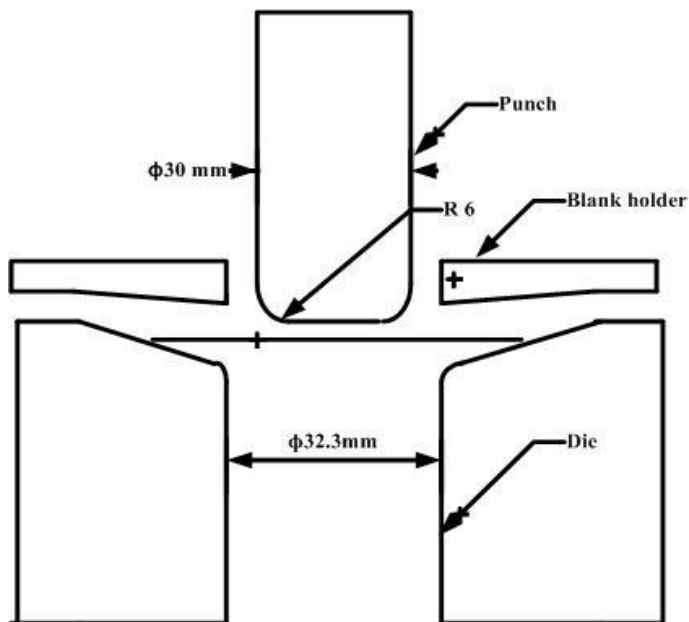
Schematic illustration of the Angular Deep Drawing test setup
